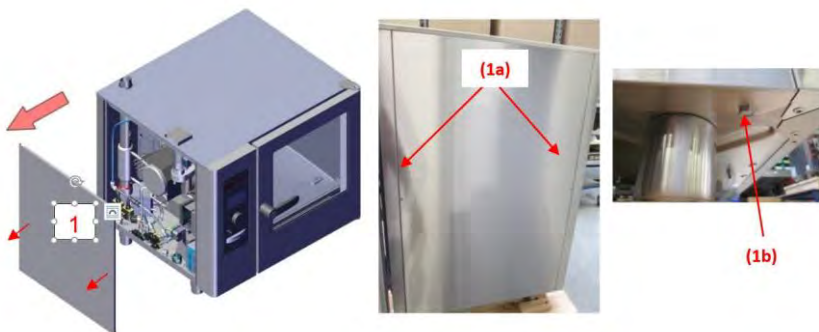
Ladder if necessary, hand-held drill, screwdriver, spanner
